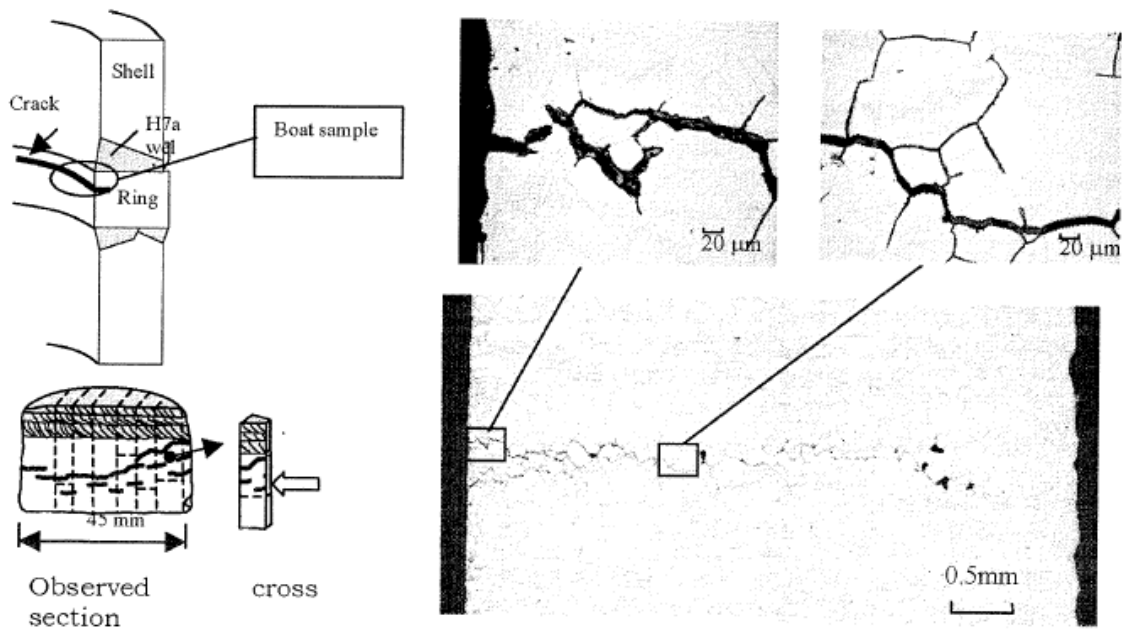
Cross-sectional observation of SCC crack in shroud support ring.
